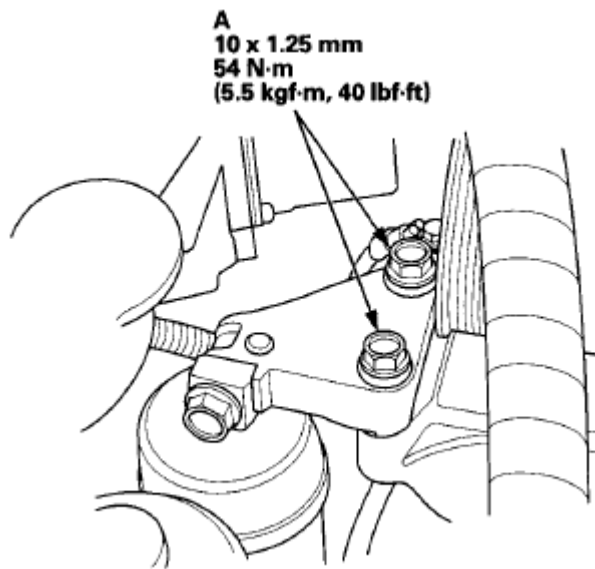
Installing Front Engine Mount Stop With Torque Specifications
